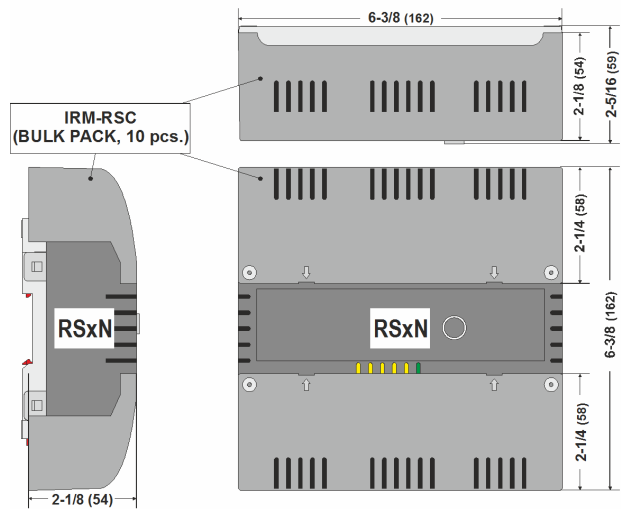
Small housing, with terminal protection covers, dimensions in inch (mm)
